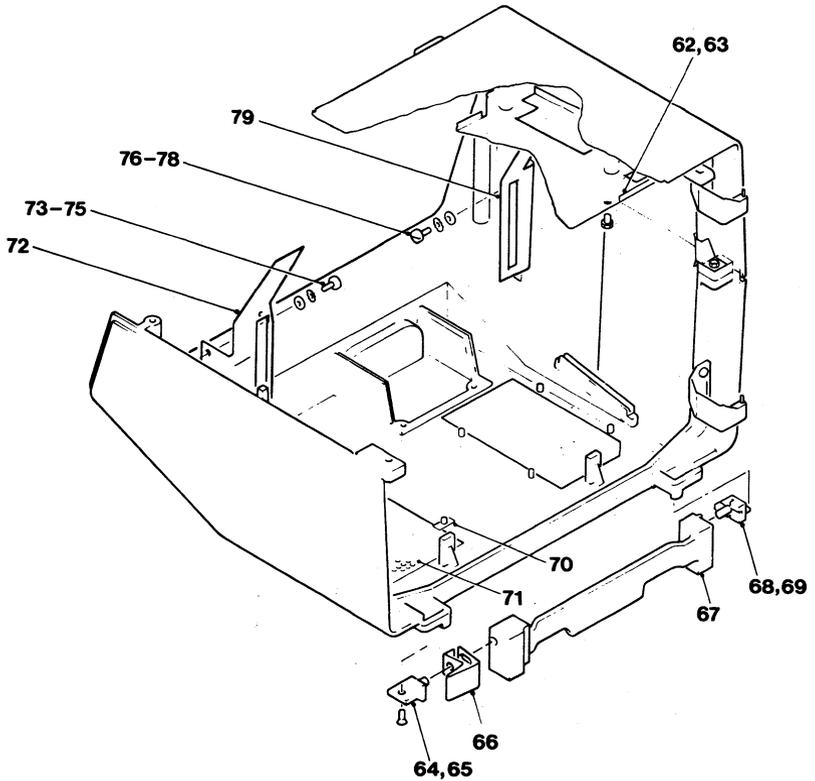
(Sheet 4 of 4). Front Enclosure Assembly
